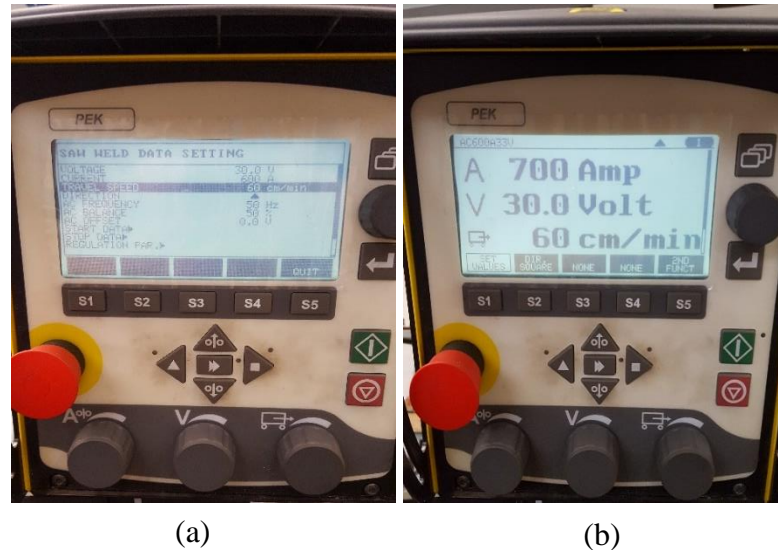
Setting before welding (a) showing the parameters (b) ready for welding
